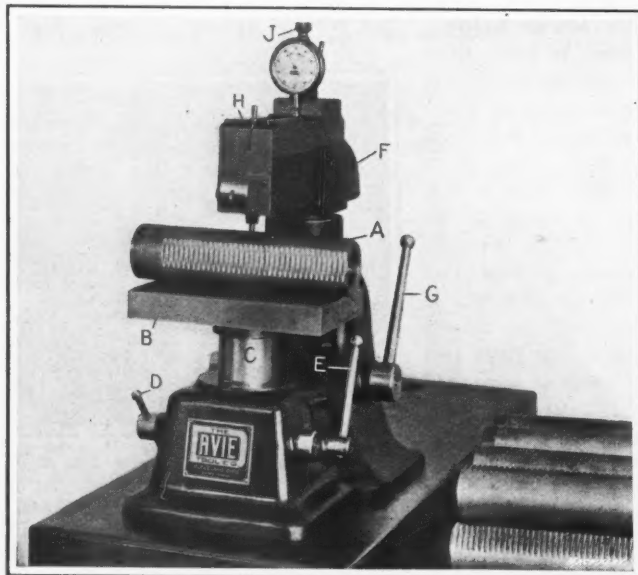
Davie Gaging Machine with Dial Indicator reading to 0.00001, 0.0001 or 0.001 Inch
